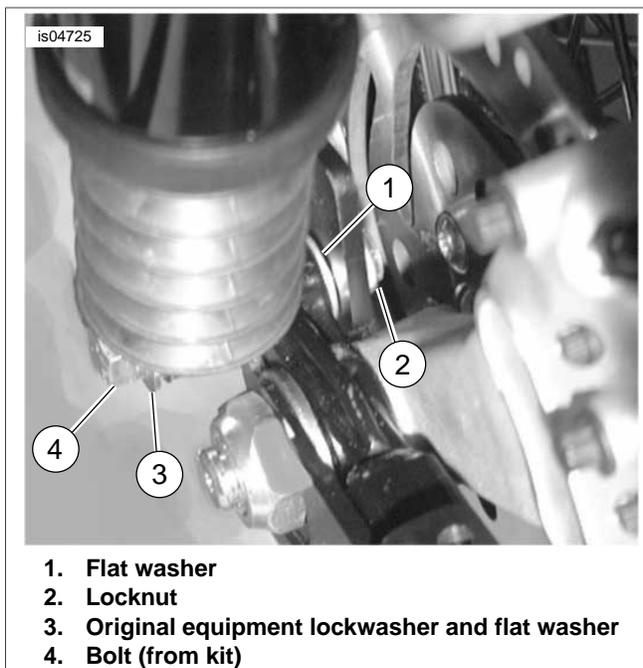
Install Shock and Mounting Hardware (2007 and Earlier Shown)
